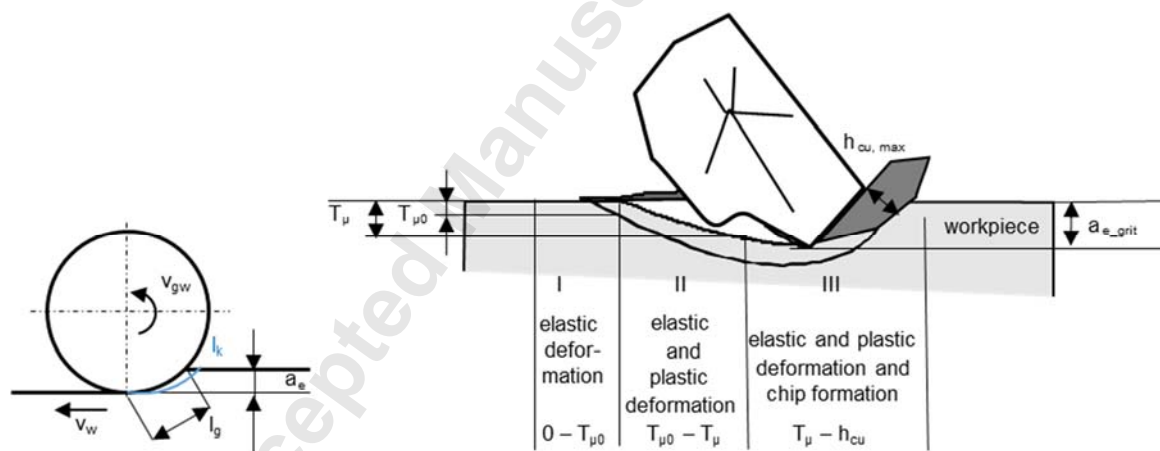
Left: Wheel engagement in surface grinding, Right: Grit engagement zones (after [4, 12])
